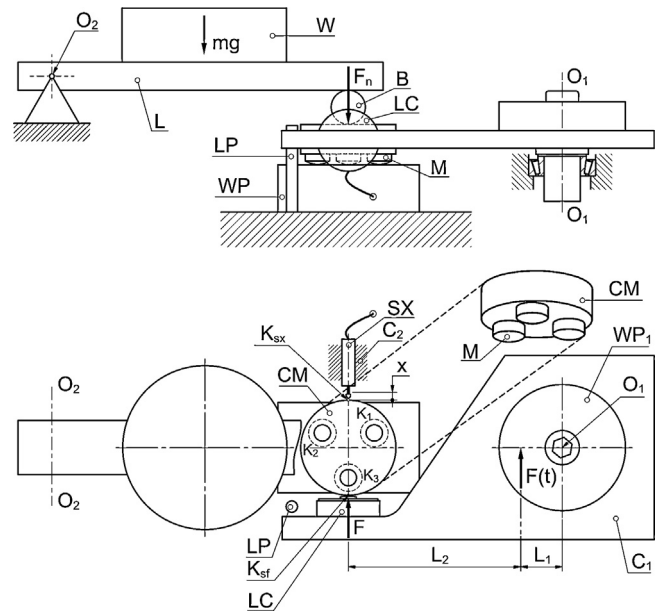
Schematic drawing of the device for measurement of dynamic compliance of fixture–workpiece interface.
